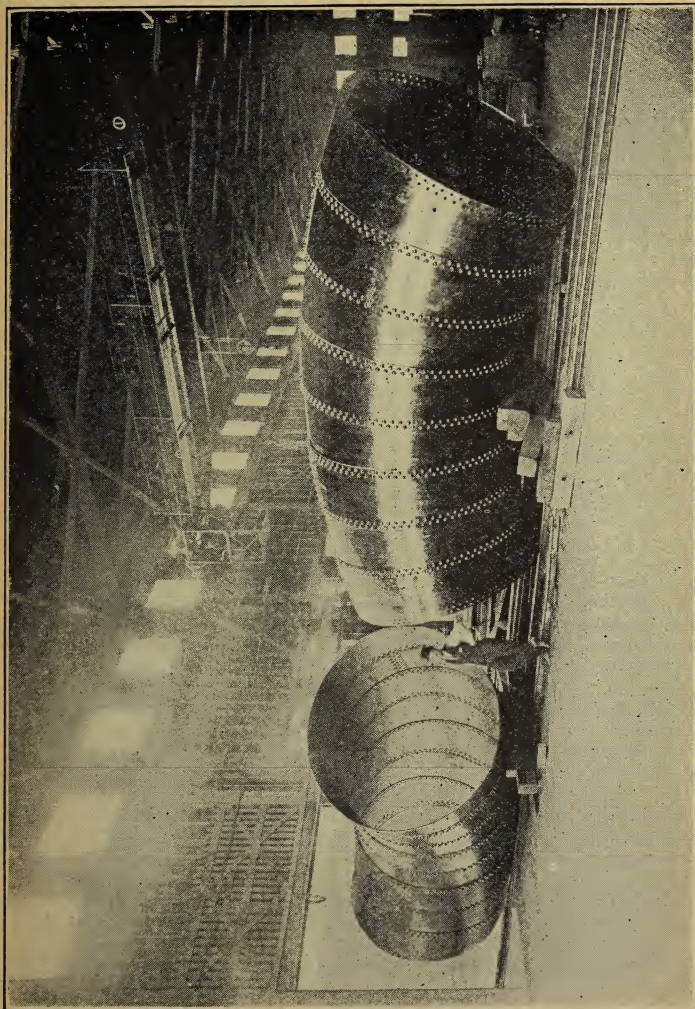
DOUBLE RIVETED STEEL BENDS OF LARGE DIAMETER.
